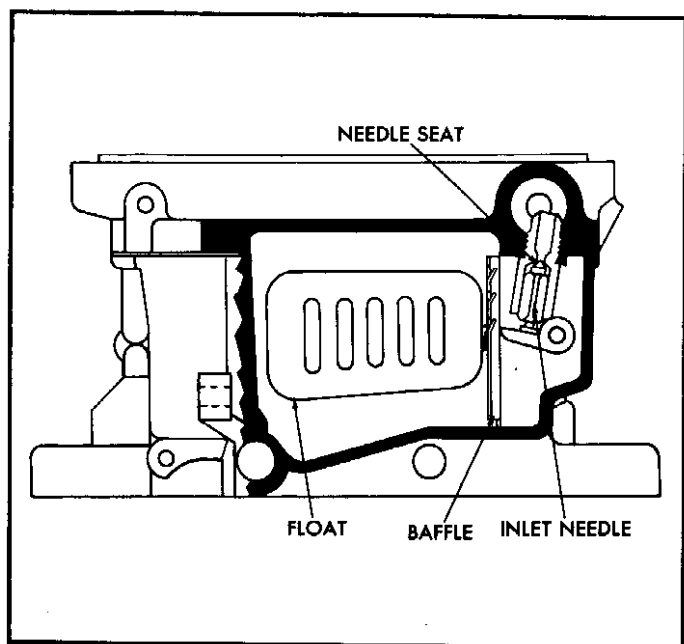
E-4—Fuel Inlet Valve and Seat Assembly
